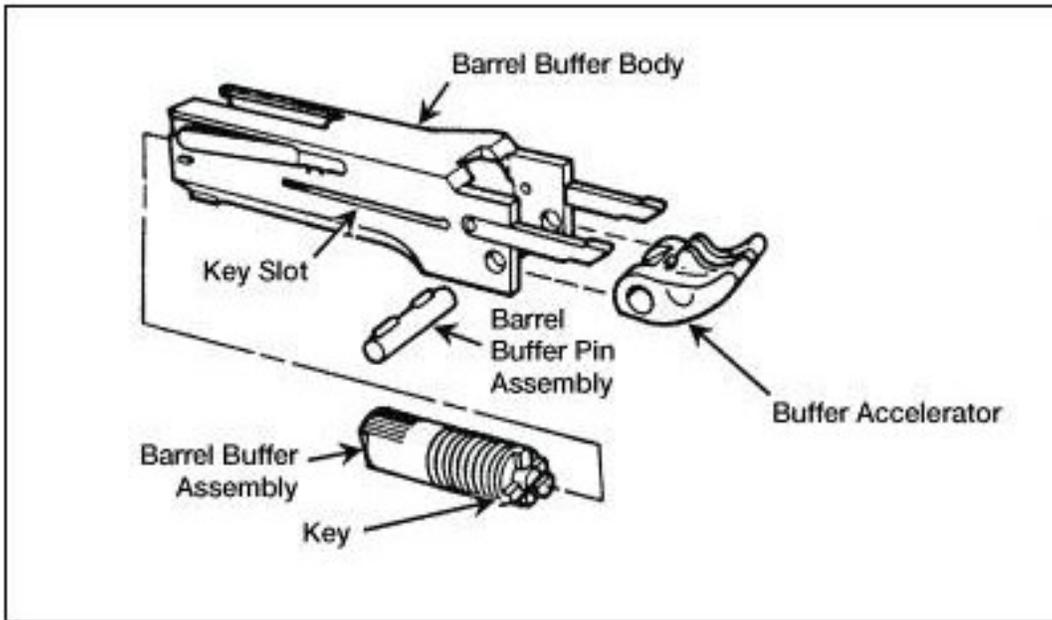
ST-1025_27 (Assembly of the barrel buffer assembly)
